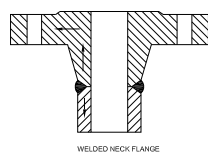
Weld Neck Flange with Pipe Fitup
